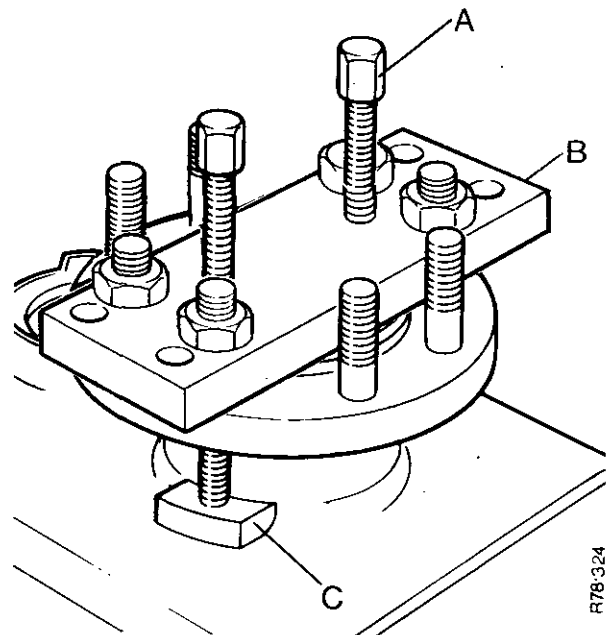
REMOVAL OF FINAL DRIVE SHAFT
